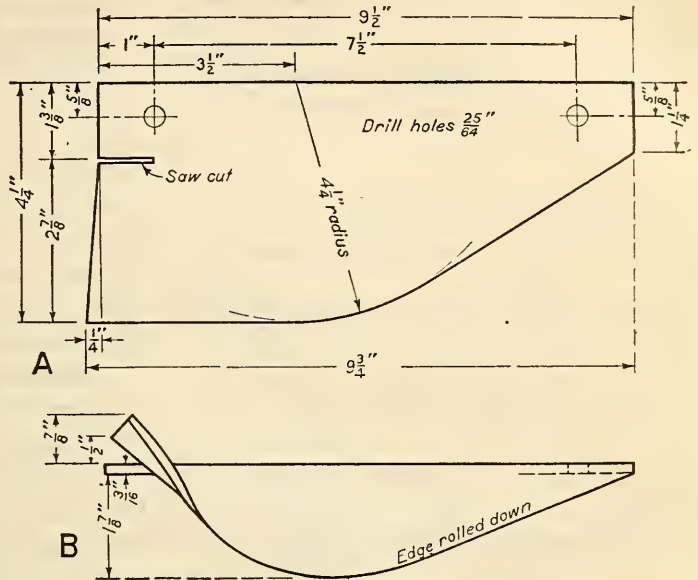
Drawings of elevating chute, Case-Osborne corn binder
